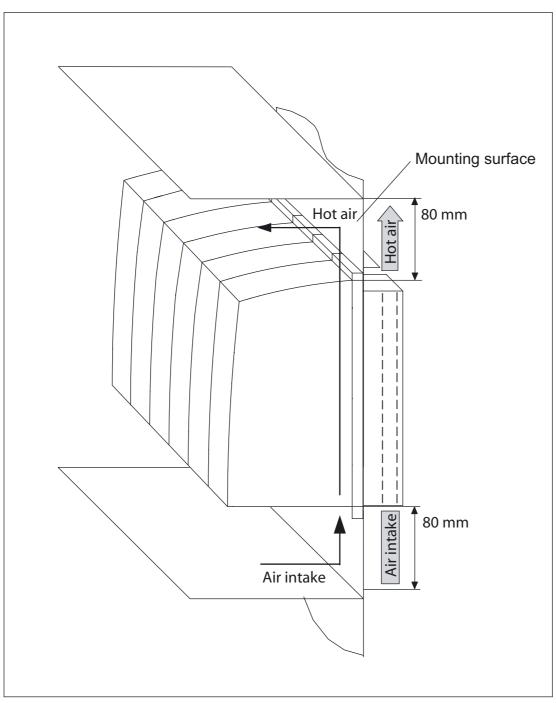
Clearances for booksize drive line-up with external air cooling
